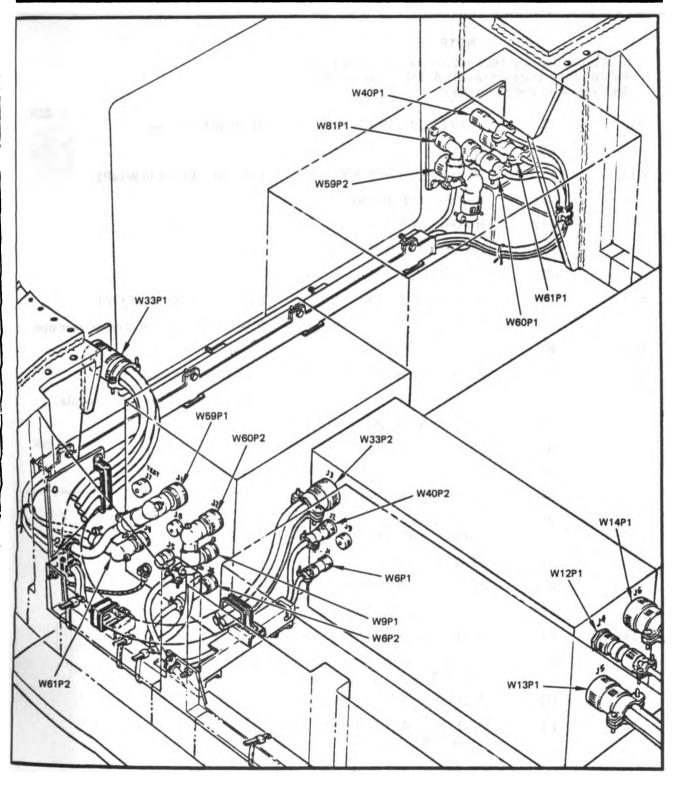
Vehicle Bed Interconnecting Cable Assemblies (Sheet 1 of 2)
